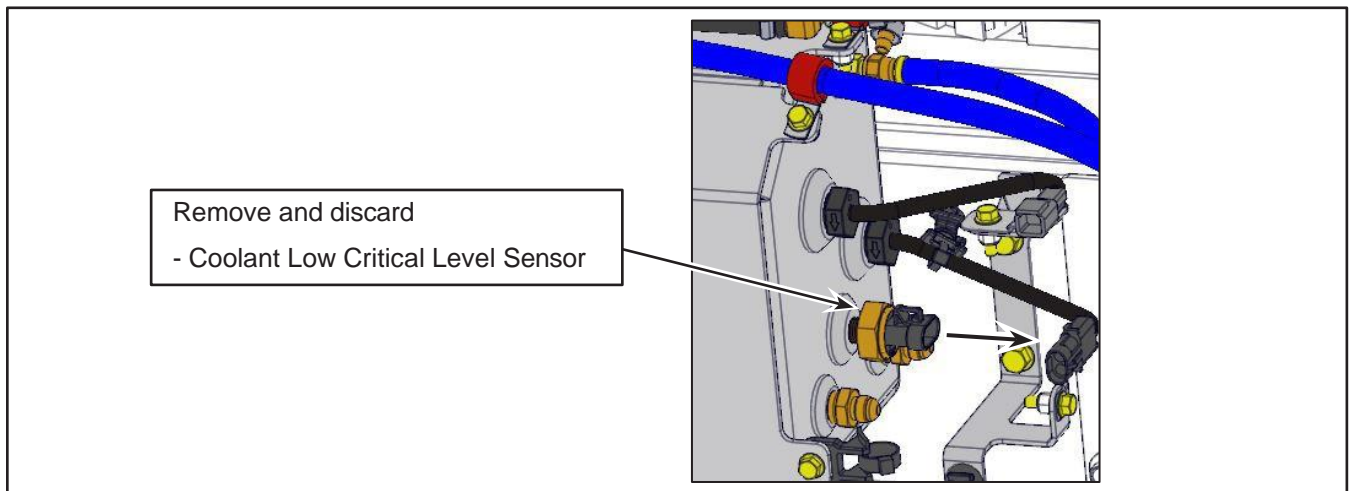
Disconnect and Remove the Coolant Level Sensor
